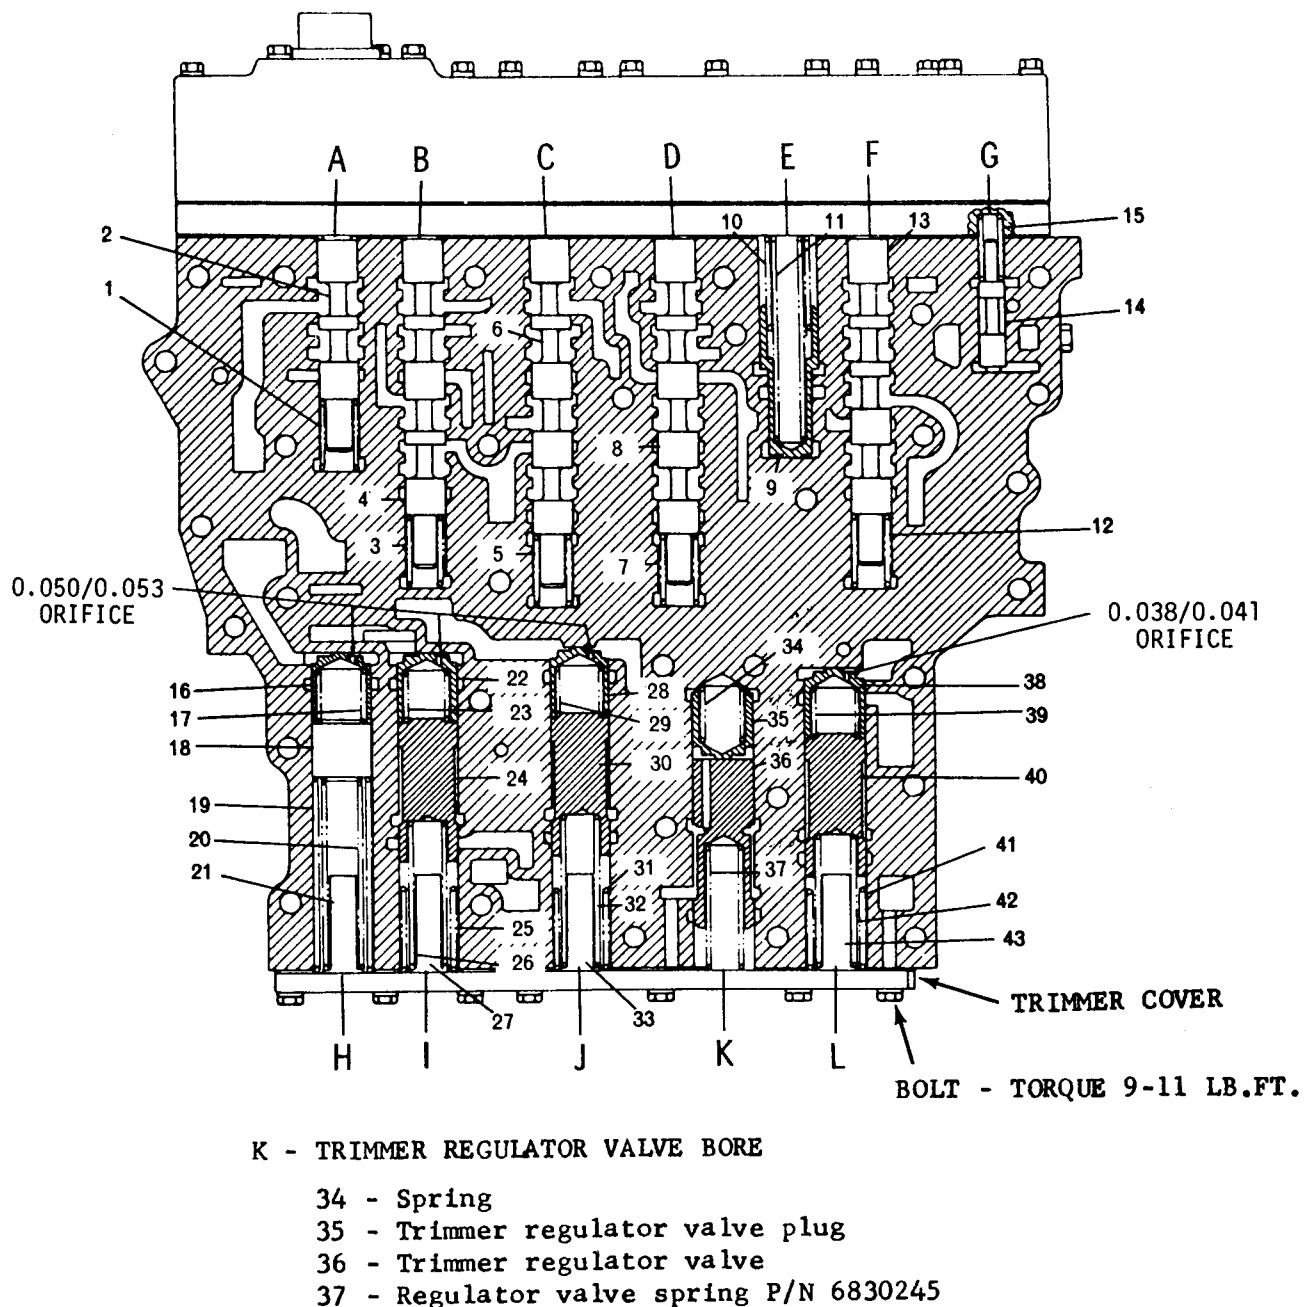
VALVE BODY, WITH COMPONENTS INSTALLED IN EACH BORE - CROSS-SECTION VIEW
